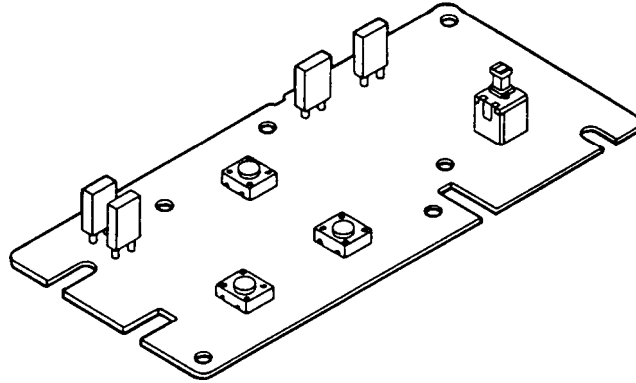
BOARD ASSEMBLY, C094 PNL (Control Panel Circuit Board)
